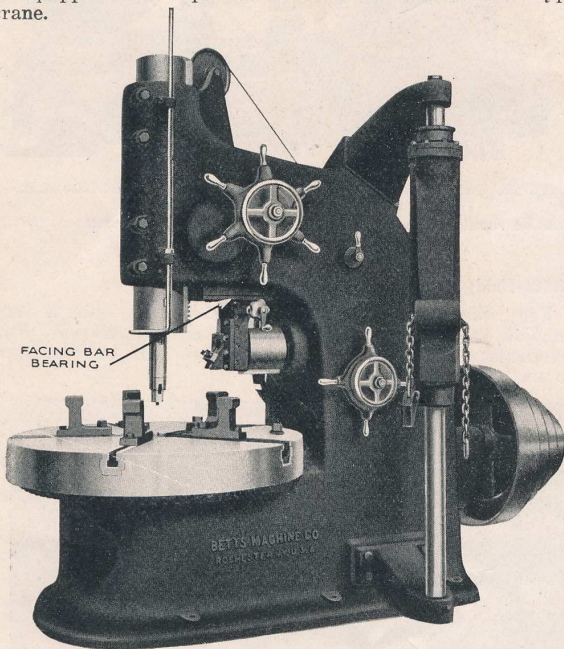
BETTS HEAVY DUTY CAR WHEEL BORING MACHINE. TYPE A6100
